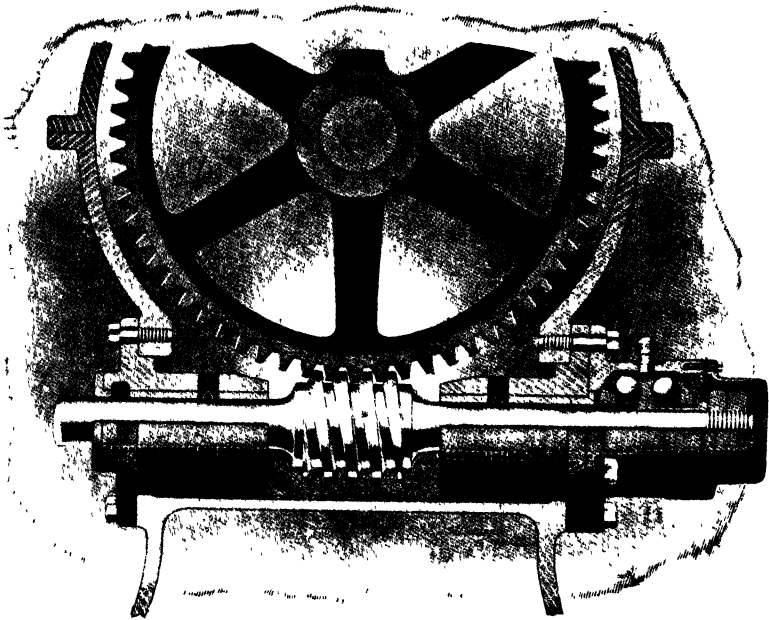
D.—Worm Gear fitted with Hoffmann's double ball thrust bearing.
